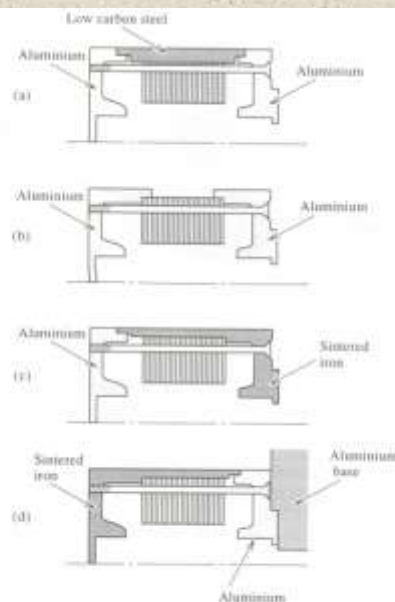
Brackets (flange and end bell) and housing. Rotor and bearings are not shown.
